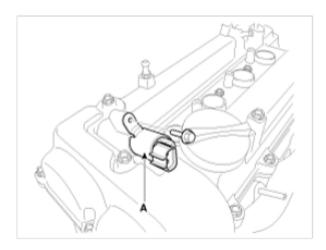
Identifying Exhaust Oil Control Valve Courtesy of HYUNDAI MOTOR AMERICA
